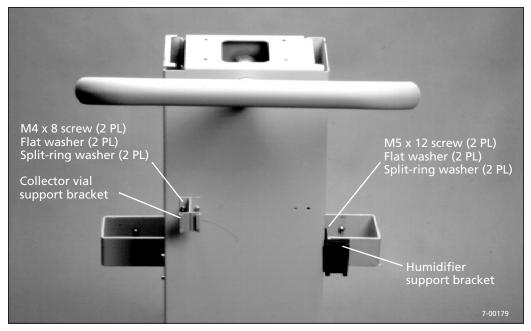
Removing collector vial and Fisher & Paykel™* Humidifier support brackets from cart
